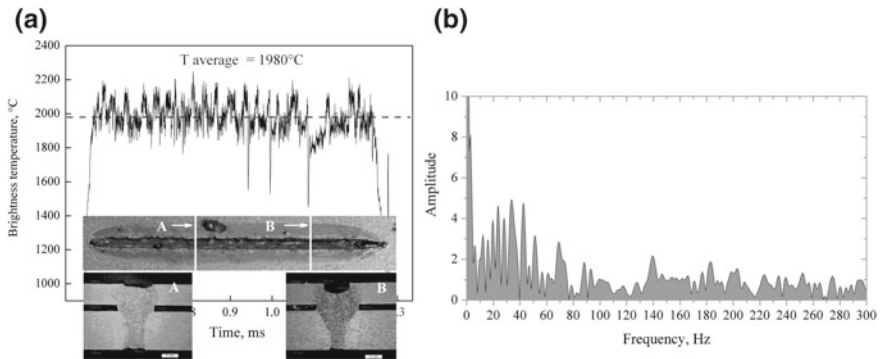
Lap welding of zinc-coated steel sheets by continuous Nd:YAG laser. Parameters: welding speed is 2,500 mm/min, laser power is 2 kW, sheets of 0.7 + 1.25 mm, gap 0.2 mm. a pyrometer records and photos of the welding seam cross sections; b frequency analysis by fast Fourier transform
